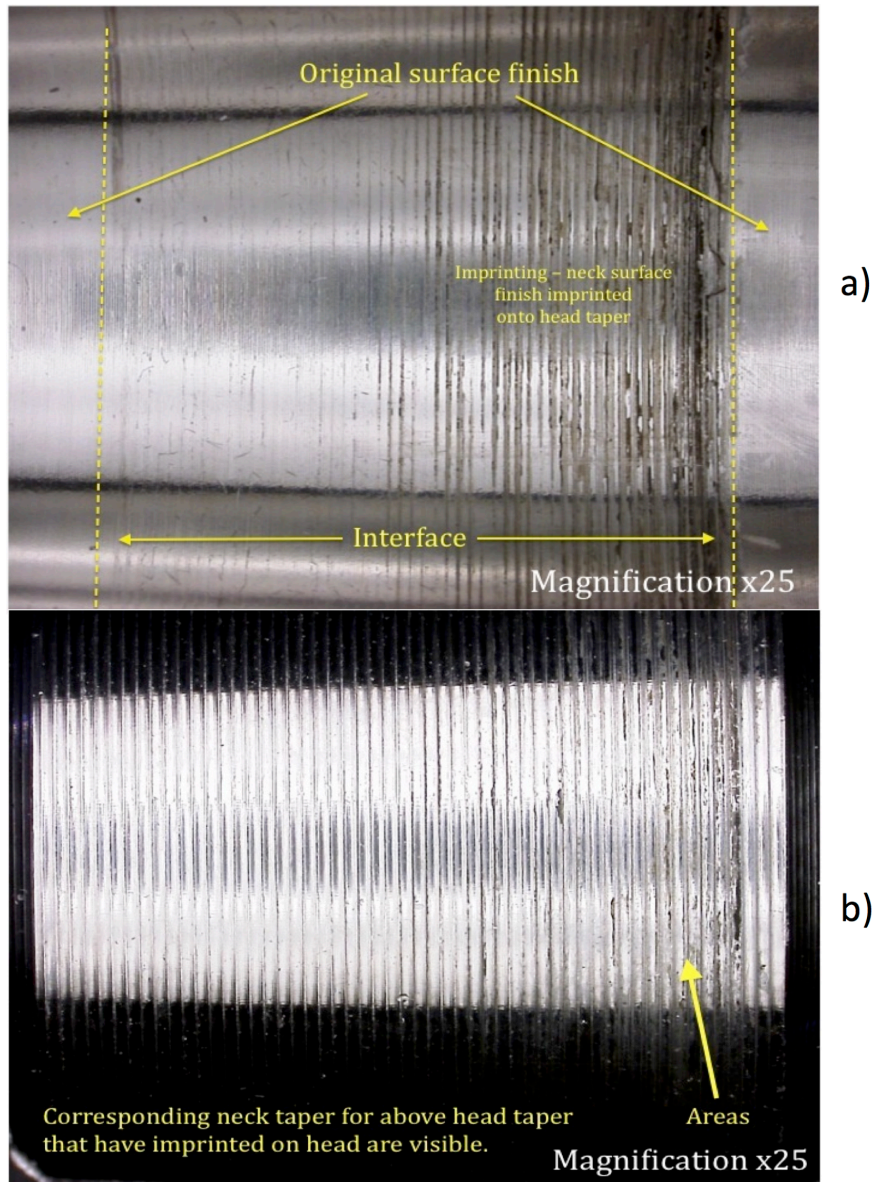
Light microscopy pictures of head taper (a) and neck taper (b) impacted at 4kN showing evidence of Goldberg Type 2 corrosion following 5 million cycles of sinusoidal loading. The surface finish of the neck taper is imprinted onto the head taper.
